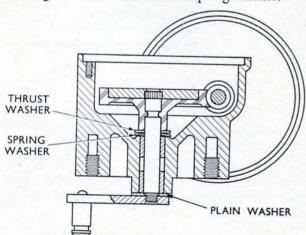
Sectioned view of wiper motor showing location of washers on cross-shaft
